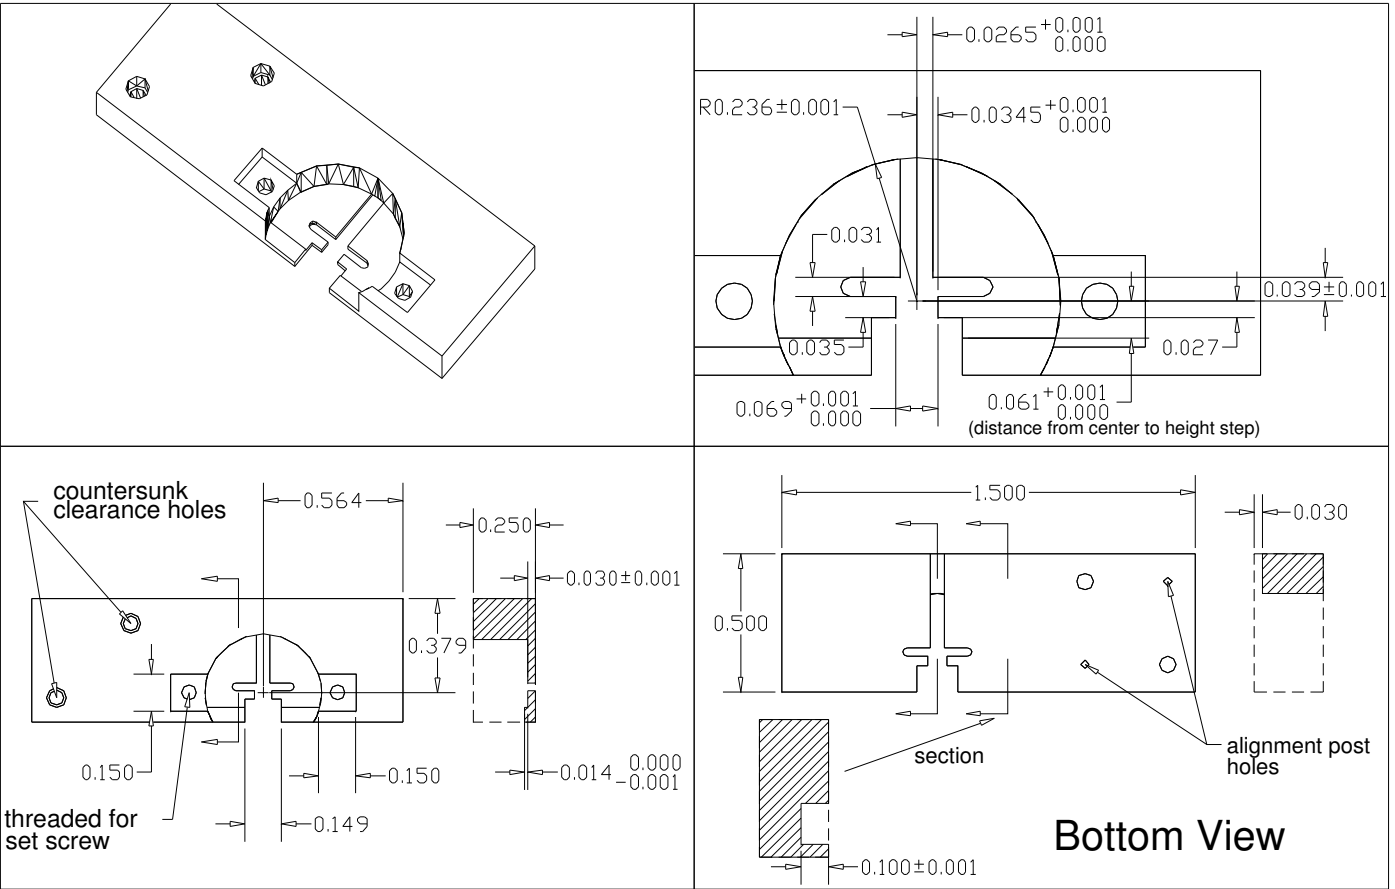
Dimensioned upper part of mount for hyperhemispherical lens. Dimensions are in inches.
